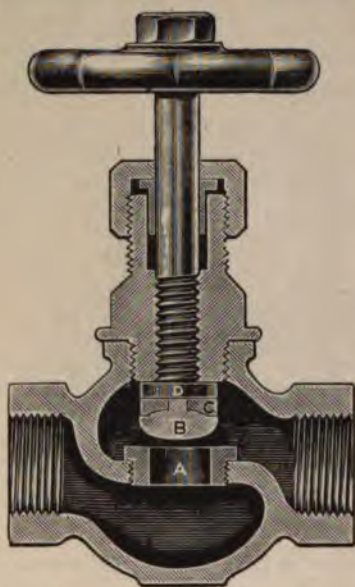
One form of Stop Valve, made by W. H. Willcox, which shows the principle of the apparatus very clearly. The Valve would be inserted between the Pipe leading to the Steam Chest and that coming from the Boiler. Steam enters from the Boiler, through the aperture on the left, and when the Valve is open, passes up through the Valve Seat A, and out to the right, to the Engine. When the portion B is forced down on to A, the passage of Steam is prevented, and its flow can be regulated by leaving B closer to or farther from A. In this Valve B and A are renewable.
